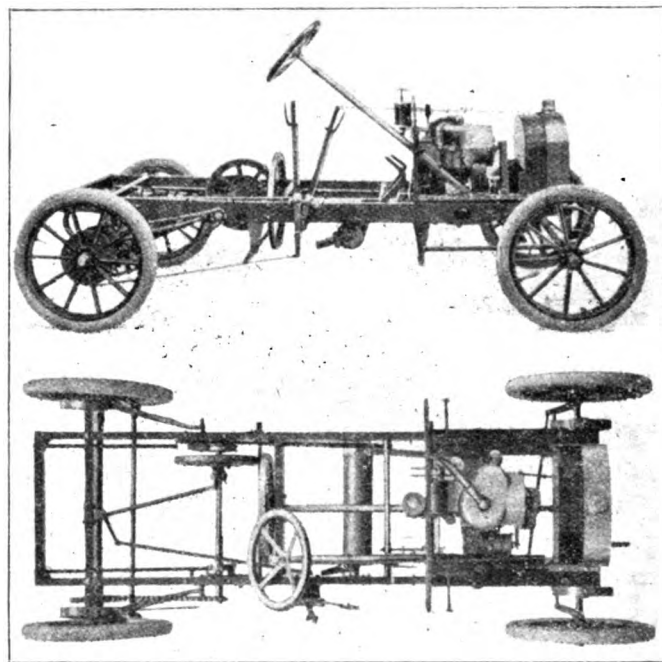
Elevation and Plan of Turicum Friction-Driven Voiturette.
